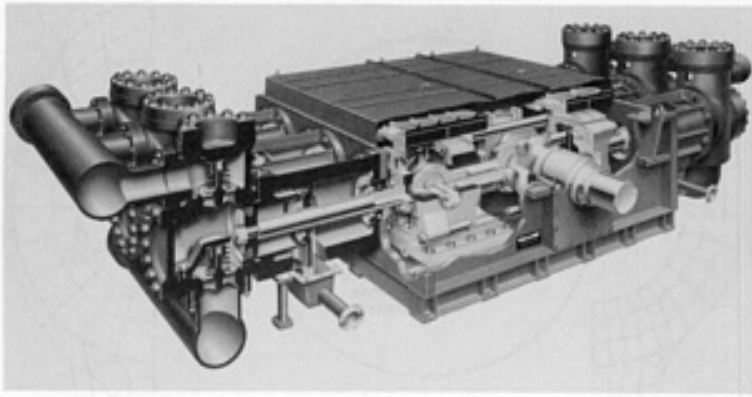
Cutaway view of a reciprocating pump. Courtesy of Dresser Pump Division, Dresser Industries
